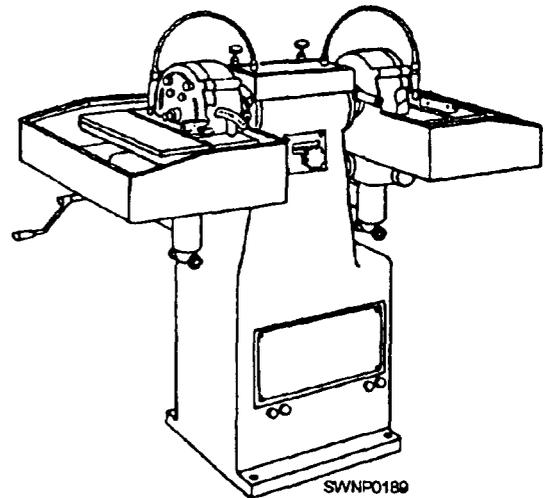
Pedestal grinder (wet type) with a built-in coolant system
